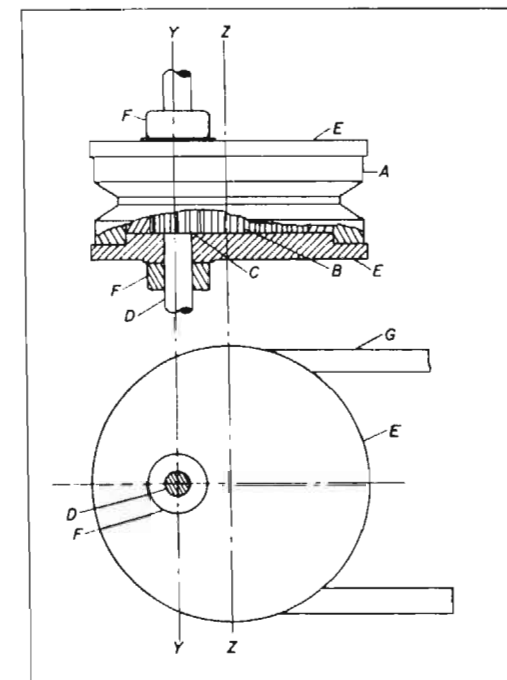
Compact speed reducer mounts directly on drive-shaft *D*. Driven sleeve *A* is coupled to moving machine member by V-belt *G*.
